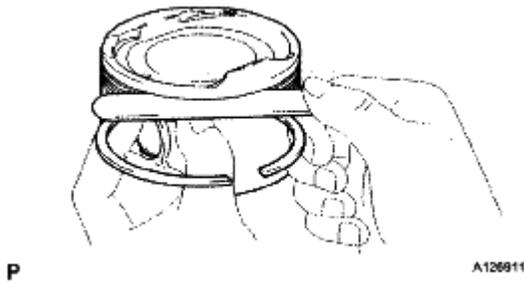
Measuring Clearance Between Piston Ring And Ring Groove
